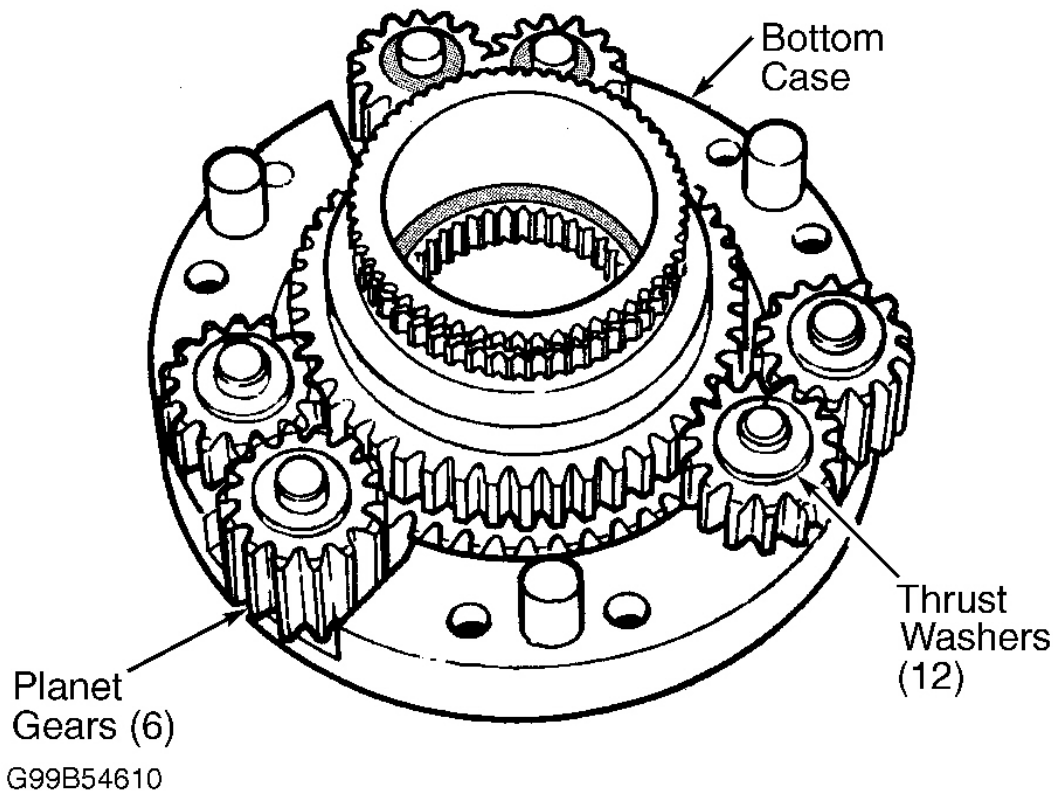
Removing Differential Planetary Gears & Thrust Washers
